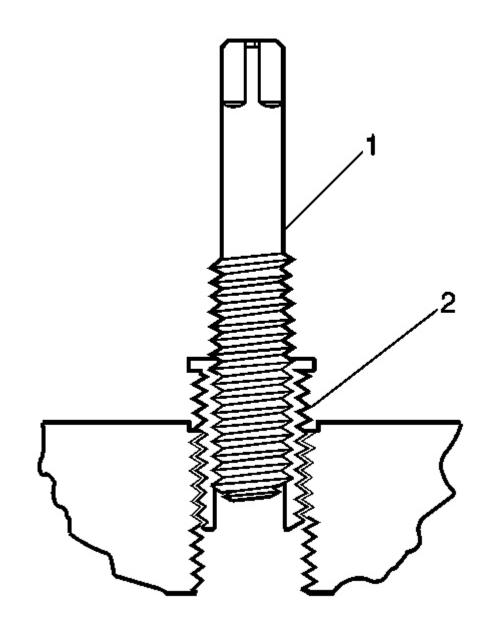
Installing Insert Into Tapped Bolt Hole Courtesy of GENERAL MOTORS CORP.
